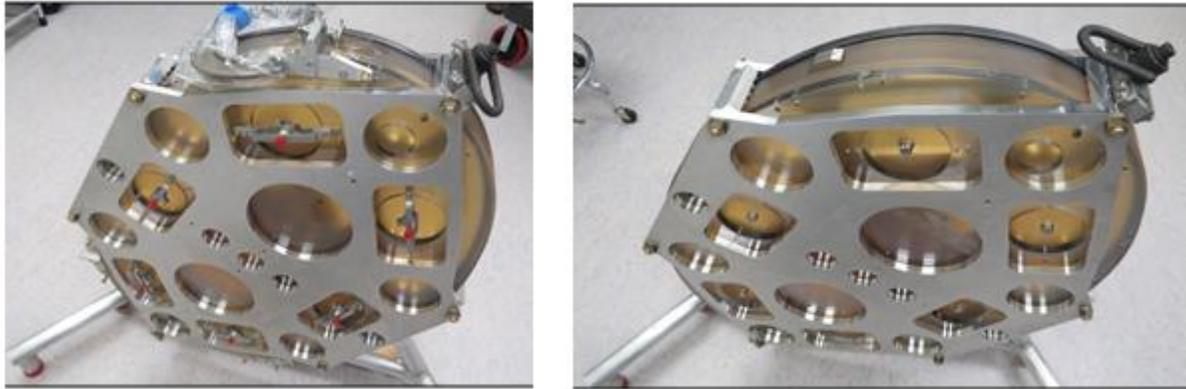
Mirror at Keck in the glue jig fixture. The fixture is on a stand so that the tooling can rotate about the mirror center. This allowed positioning the three lateral pucks on edge to be individually upright for easy work access. Left image is mirror fixtured prior to bonding. Right image is after bonds sufficiently cured and with puck positioning hardware removed.
